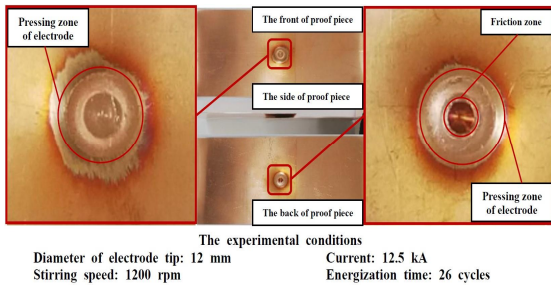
The shape of surface of spot welded sheets by electric Resistance heated Surface Friction Spot Welding (RSFSW)
